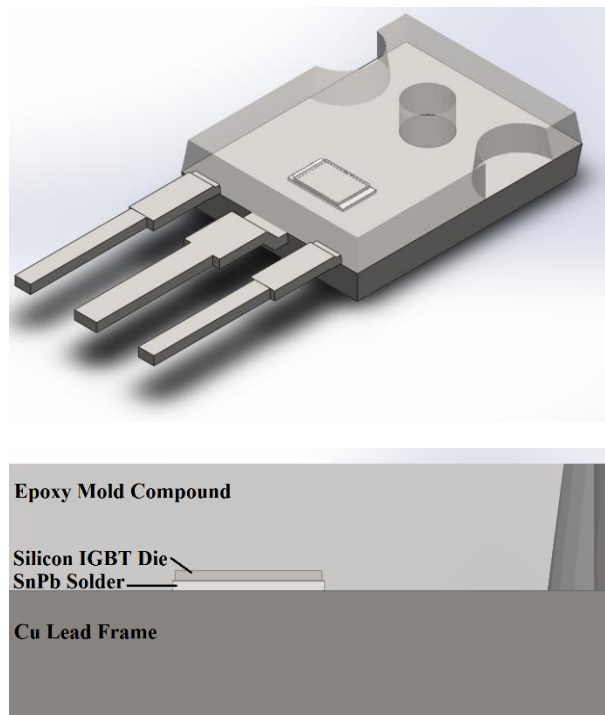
CAD design for the discrete TO247 IGBT package and the cross-section view of the material stack.
